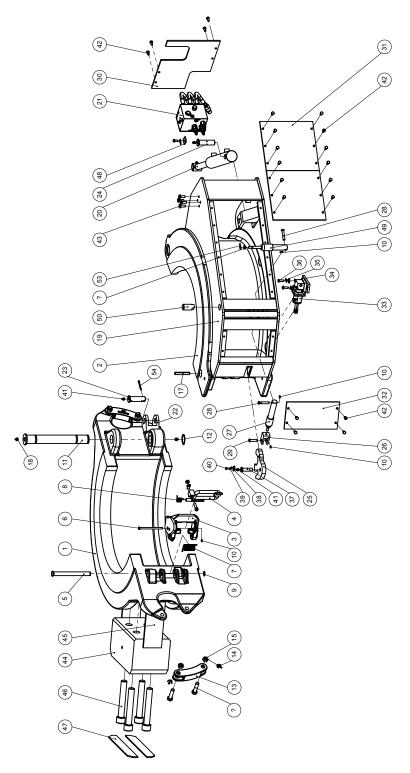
641620-Y-BC-H SDS 150/7 Hydraulic operated side door elevator I
